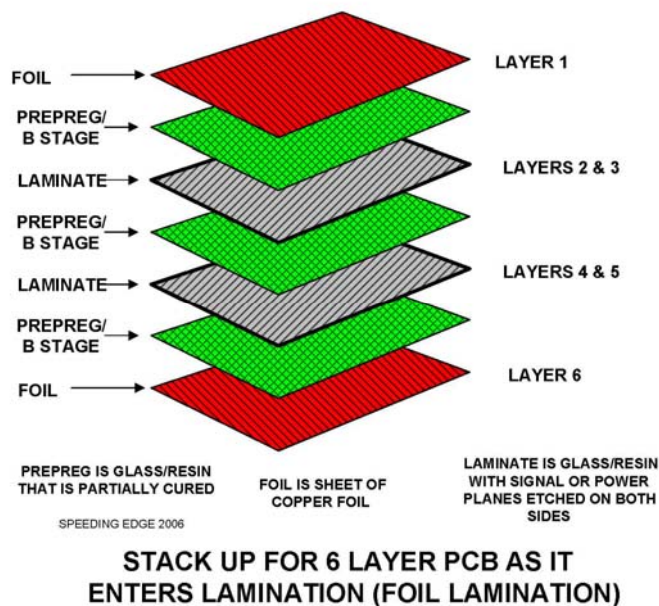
A Typical Six-Layer PCB Stackup Using Foil Lamination
